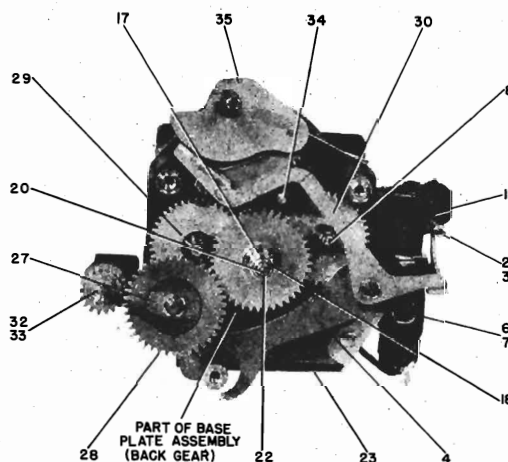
Front View, C57 Clocks—Front Plate Removed
